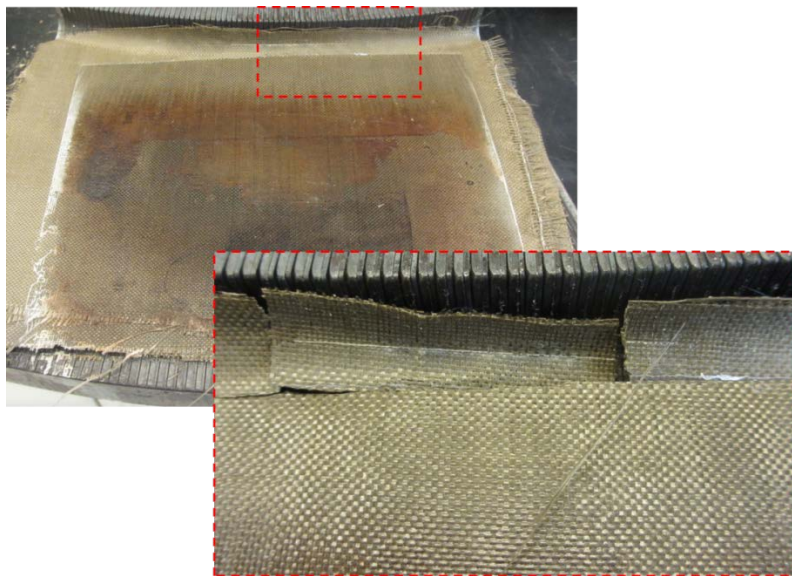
Molded CFB Laminate Fracturing of Polysilazane (VL20) Binder
